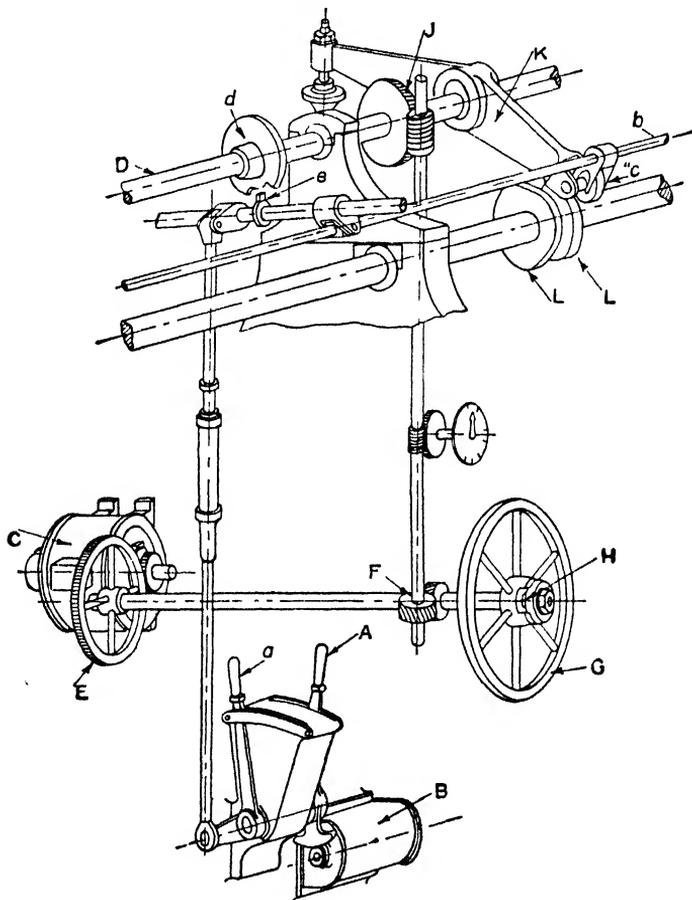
Beardmore-Tosi Marine-type Diesel Engine. Diagrammatic Perspective Arrangement of Manœuvring Gear
